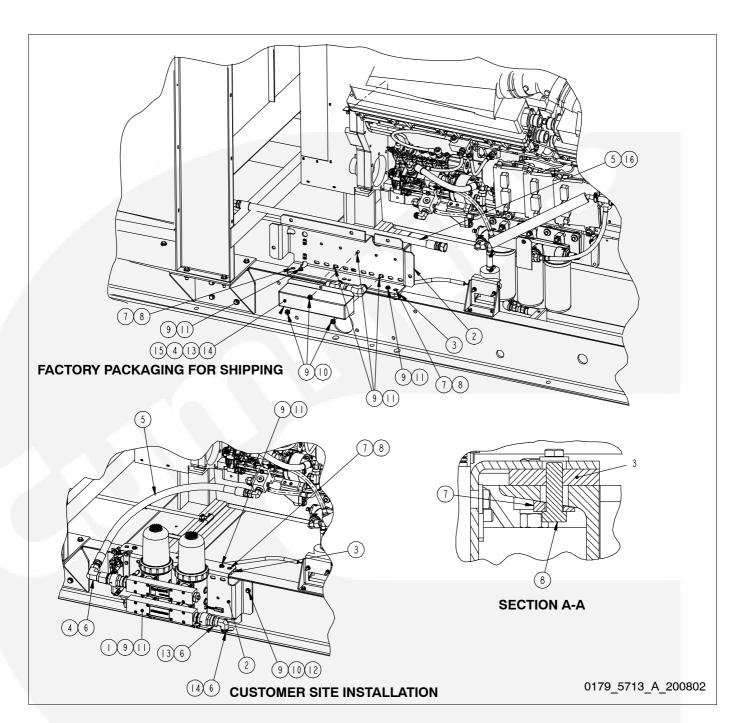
FUEL FILTER ASSEMBLY LOCATION
